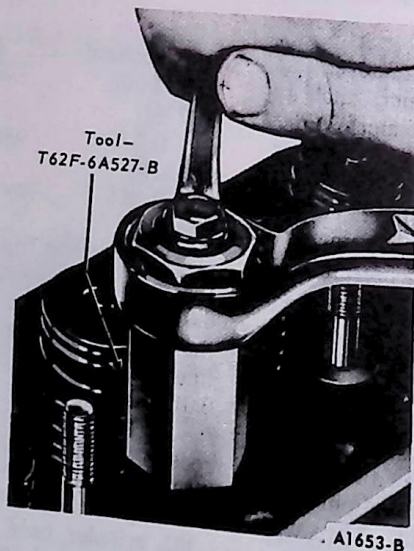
Removing Rocker Arm Stud—240 Six and 302-W V-8
